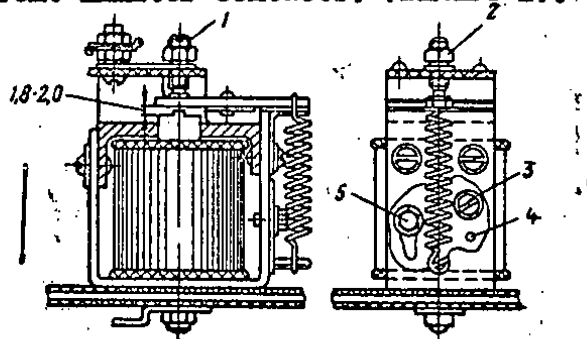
1.- contact adjustment screw K; 2.- lock nut; 3.- cam E; 4.- axis; and 5.- stop screw.
